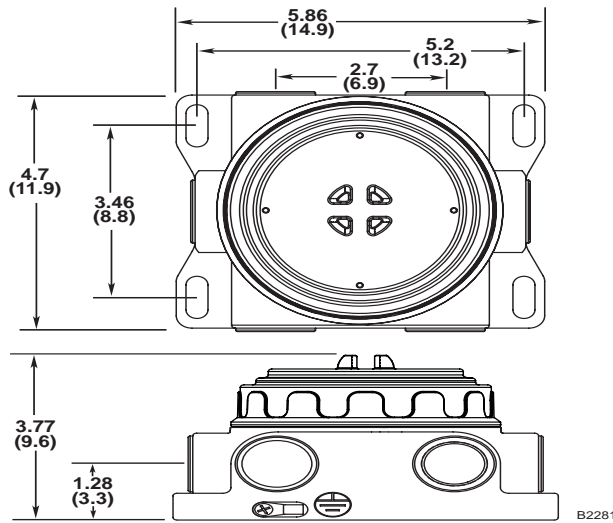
Junction Box Dimensions in Inches (Centimeters)
